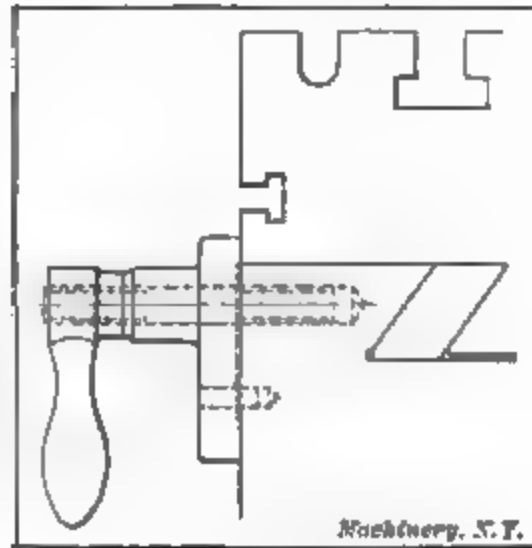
Clamping Plate for Edge of Milling Machine Table
